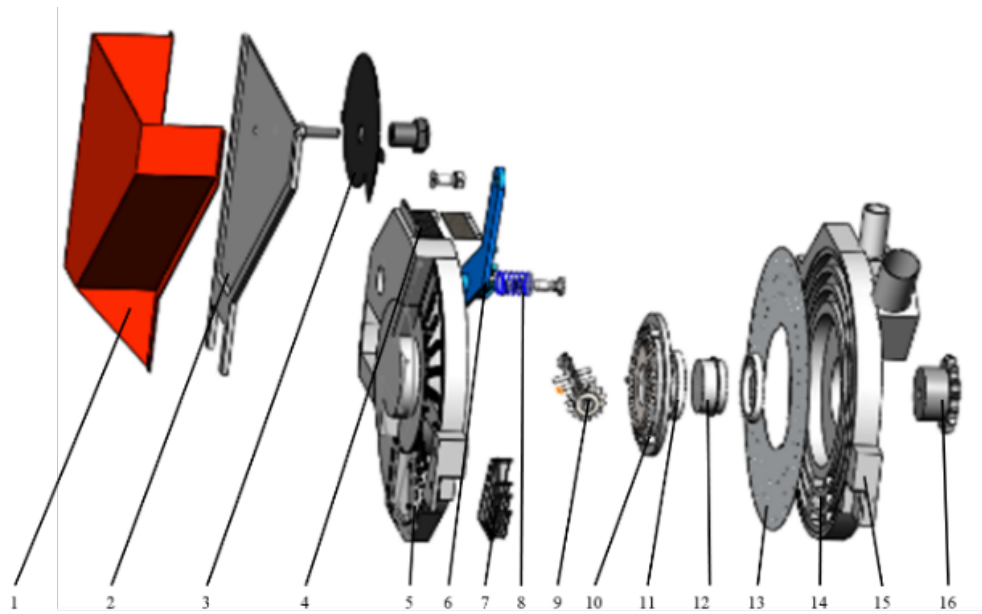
Schematic diagram of the seed metering device structure. 1. Seed box; 2. seed box connecting plate; 3. adjustment scale plate; 4. sealing brush; 5. seed box end housing; 6. brushing plate; 7. seeding support pipe; 8. adjustment spring; 9. stirring shaft; 10. conical gear plate; 11. seeding shaft bearing, 12. seeding shaft; 13. seeding disc; 14. negative pressure air groove; 15. negative pressure end housing; 16. seeding shaft sprocket.
